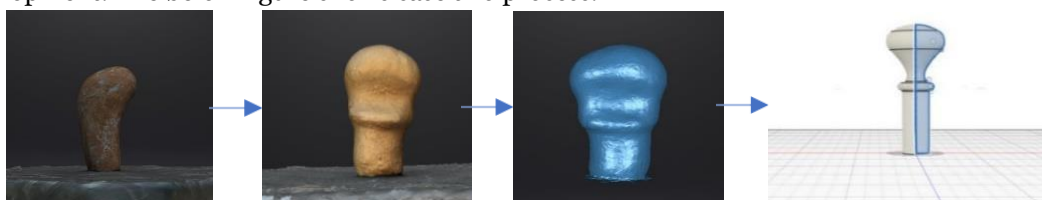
Final result of physical prototyping of the gear rod knob by using reverse engineering
